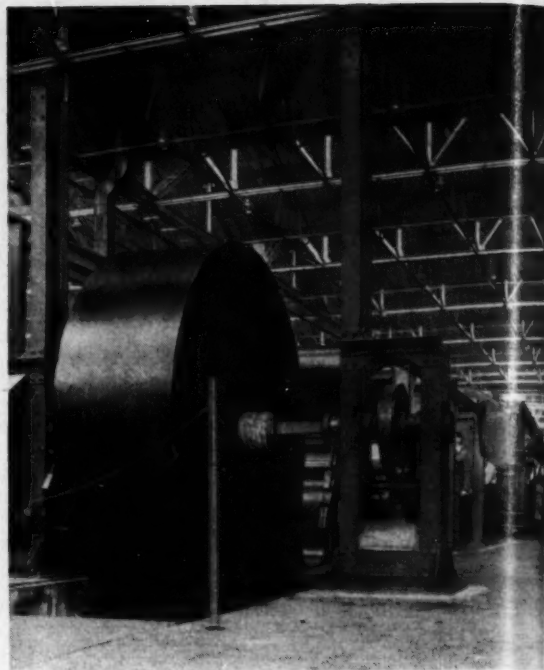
This picture shows rubber conveyor belting in process of pressing
